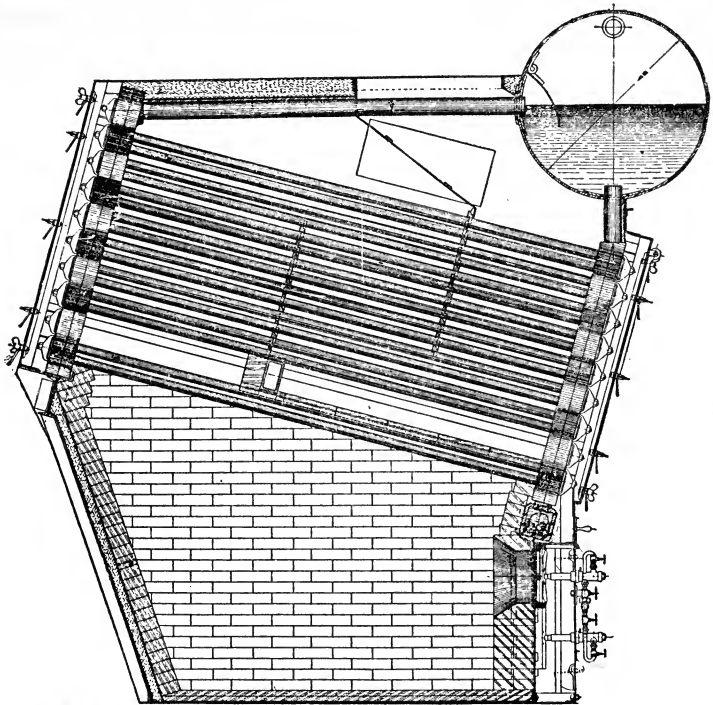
,449. Sectional view of *Babcock & Wilcox* marine boiler showing furnace and *Peabody* oil burners. The reverberating brick baffle on the bottom group of tubes direct the gases to the rear of the furnace, in which direction it will be noted that the furnace increases in height and volume. Moreover, the oil is injected into the furnace along lines nearly parallel or at a slight angle with the tubes which promotes a very even distribution of the flame along the bottom row of tubes.
